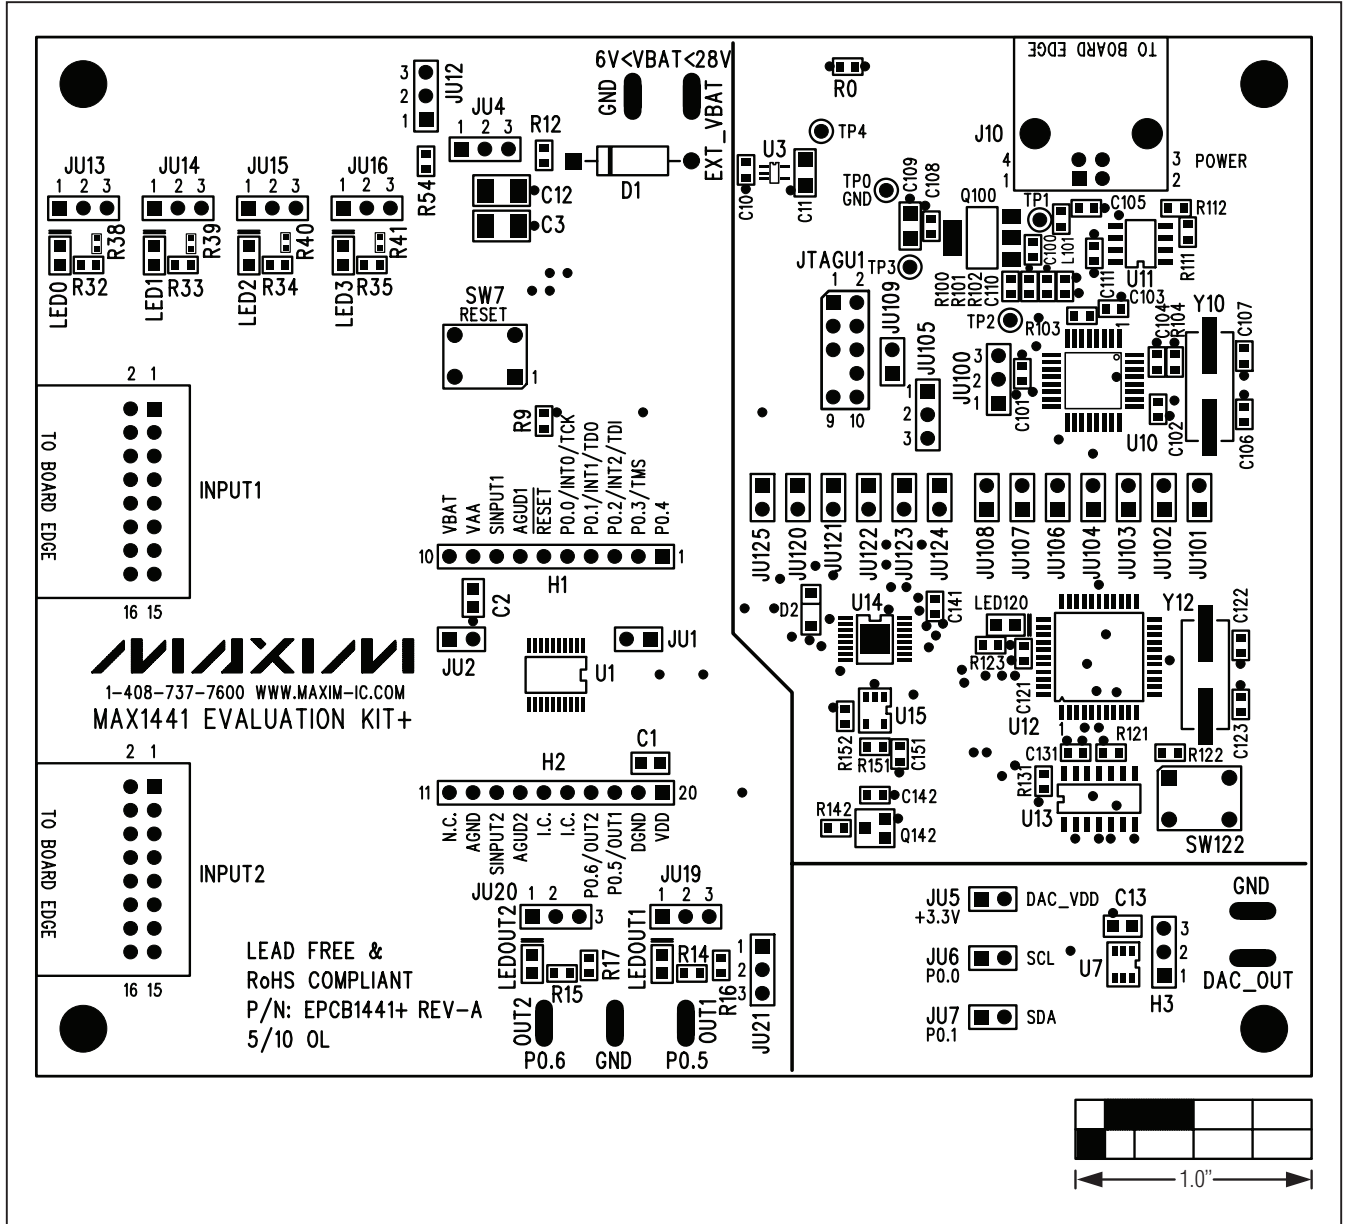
MAX1441 EV Kit Component Placement Guide—Component Side
